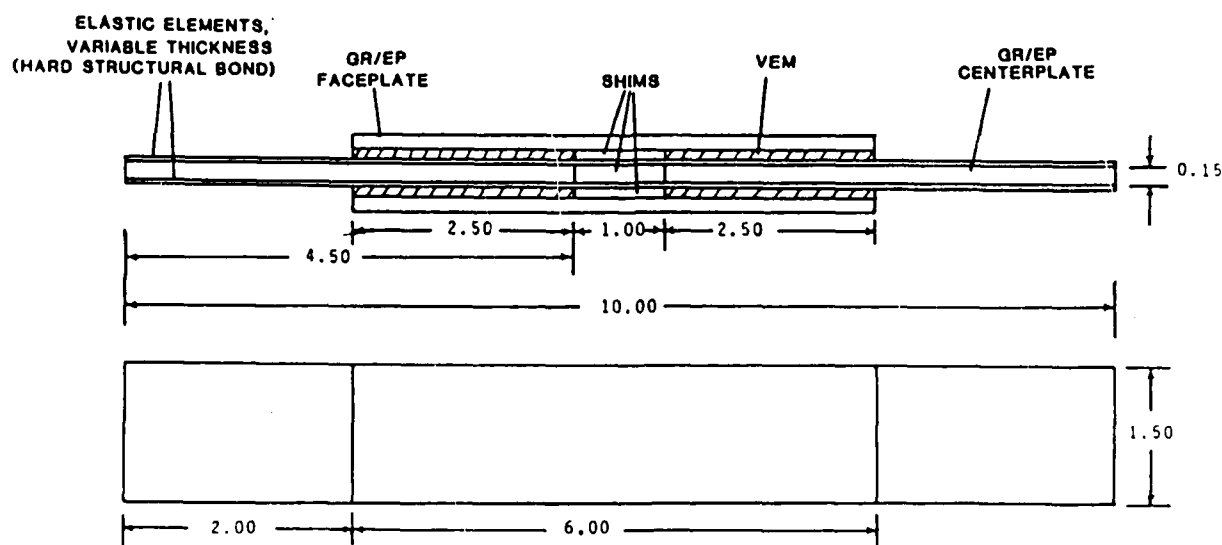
Passively Damped Joint Specimen With Elastic Elements
